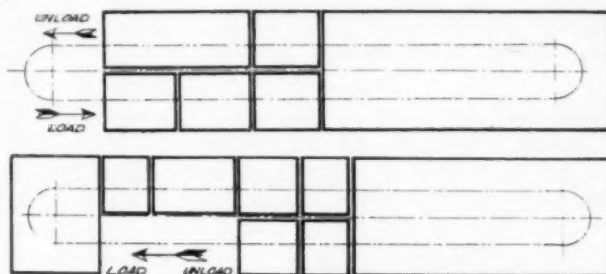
FLOOR PLAN OF A FULL AUTOMATIC CONVEYOR DESIGNED FOR END OR SIDE LOADING.
